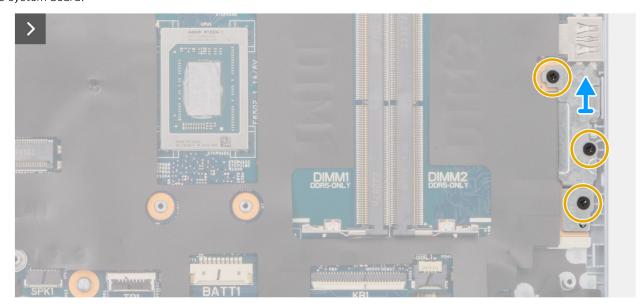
Removing the system board (for computers shipped with a plastic chassis)
